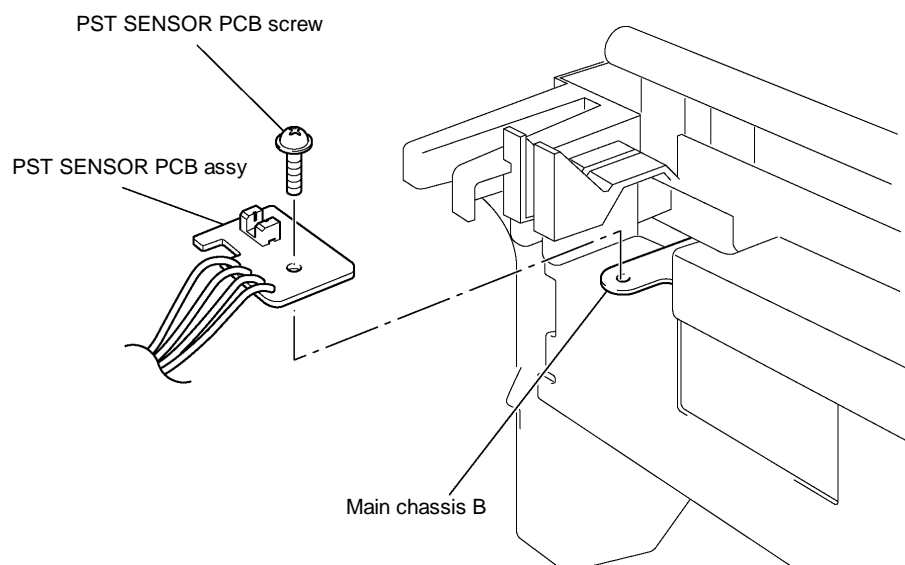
Installing the PST SENSOR PCB Assy
